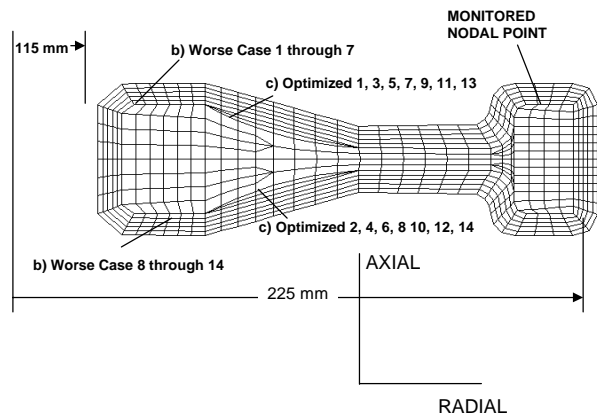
a) Finite element model of forging geometry with shaded elements indicating material to be removed, center elements signifying the final disk geometry. b) Machining sequence applied to FE model for worse case distortion (top material machined away followed by bottom material) applied to both the symmetric and non-symmetric stress conditions. c) Optimized machining sequence applied to FE model for symmetric stress state, where a 1 mm layer of material is removed from each side of the forging in a number of stages to minimize distortion.
